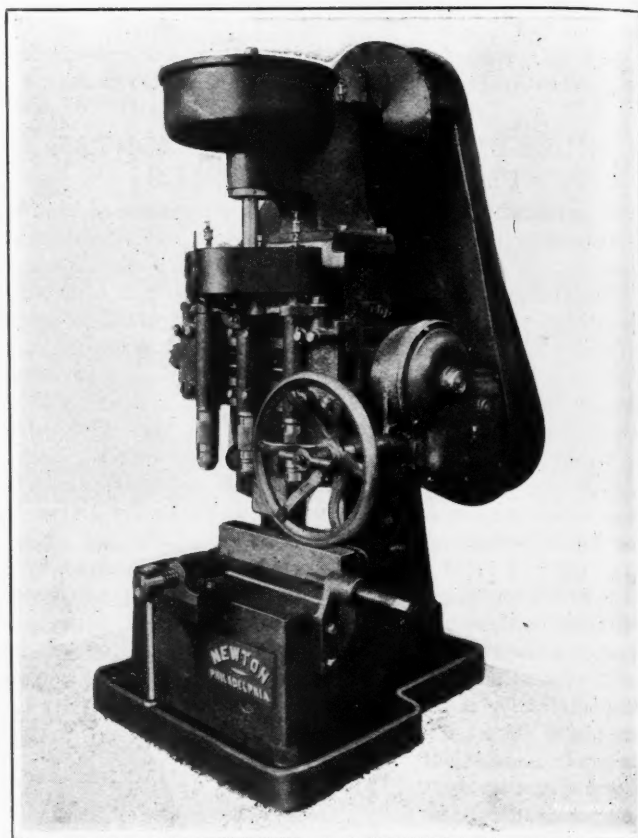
Opposite Side of Newton Rail Drilling Machine shown in Fig. 1
